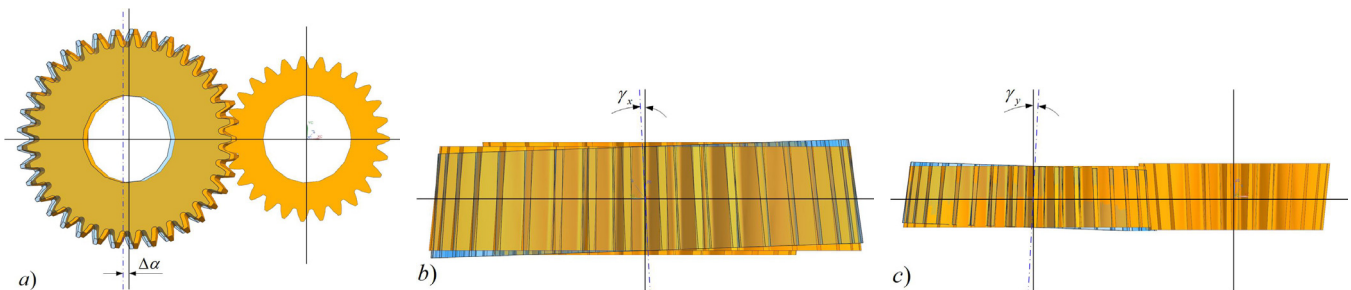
The forms of assembly errors of beveloid gear pair; a) center distance error; b) shaft staggering error; and c) shaft intersection angle error
